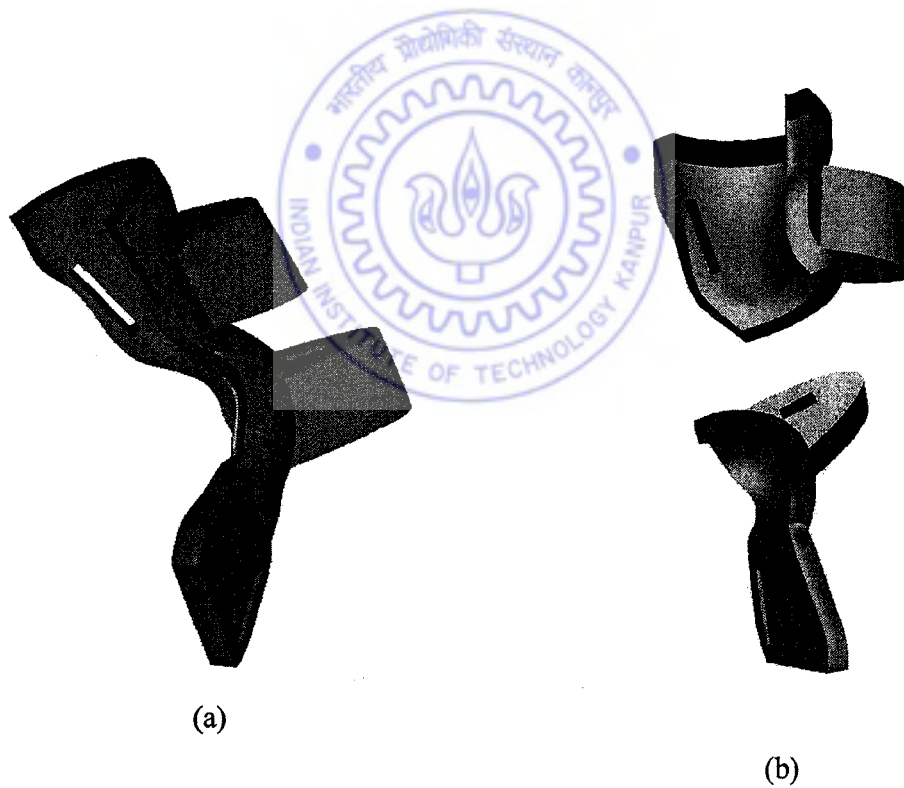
AFO having arrangement for externally fixing single hemispherical ball & socket joint (a) one piece (b) two piece (See color section)
